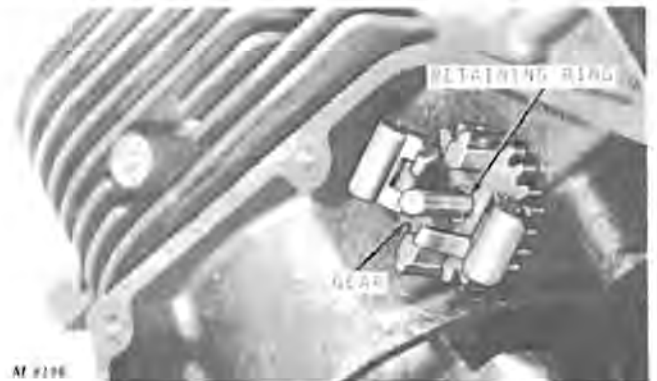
Removing Retaining Ring and Governor Gear Assembly
